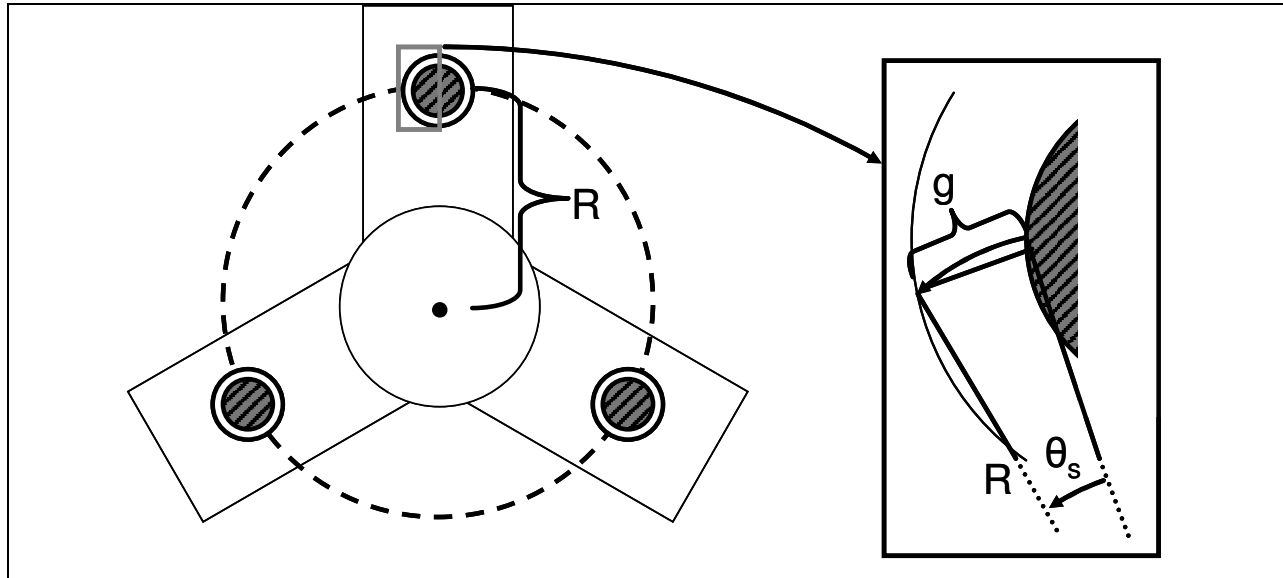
Geometry of Gap Spacing for Stop Assembly
